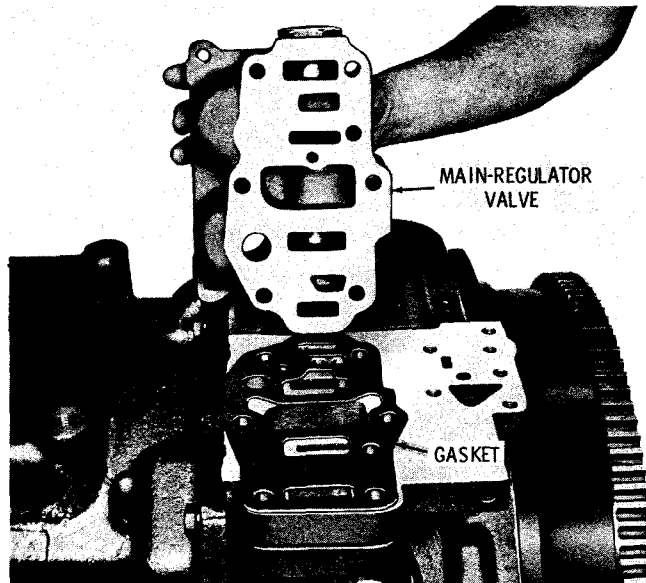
Installing main-pressure regulator valve body assembly (VCLT, VCLBT)
